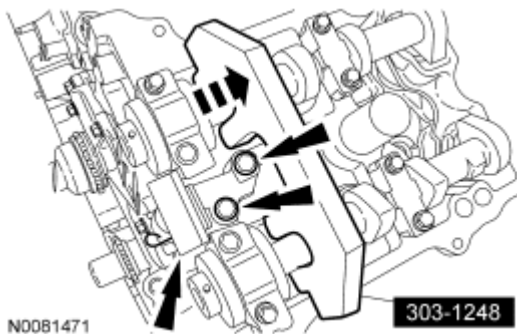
Locating LH Secondary Timing Chain Tensioner & Bolts
